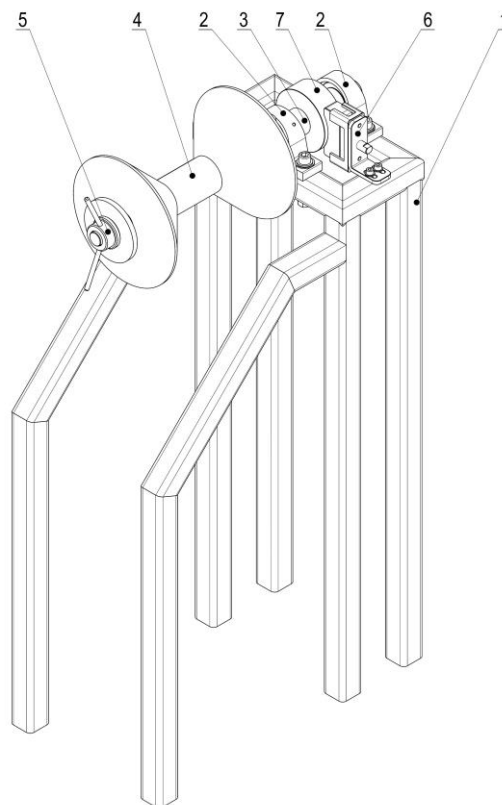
Unwind unit: 1 – frame, 2 – bearing assemblies, 3 – main shaft, 4 – spool, 5 – securing nut, 6 – drum brake sub-assembly, 7 – brake drum
